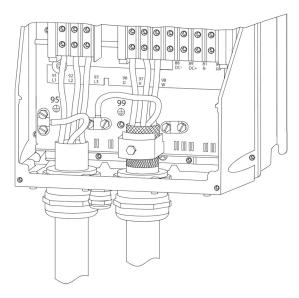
Motor, mains and earth wiring for frame sizes B, C, and D using shielded cable
